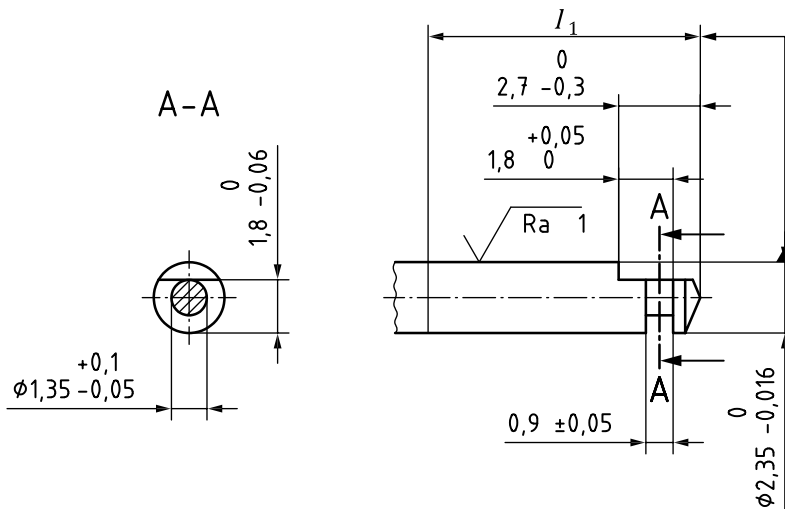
Dimensions, tolerances and surface roughness for Type 1 shank
